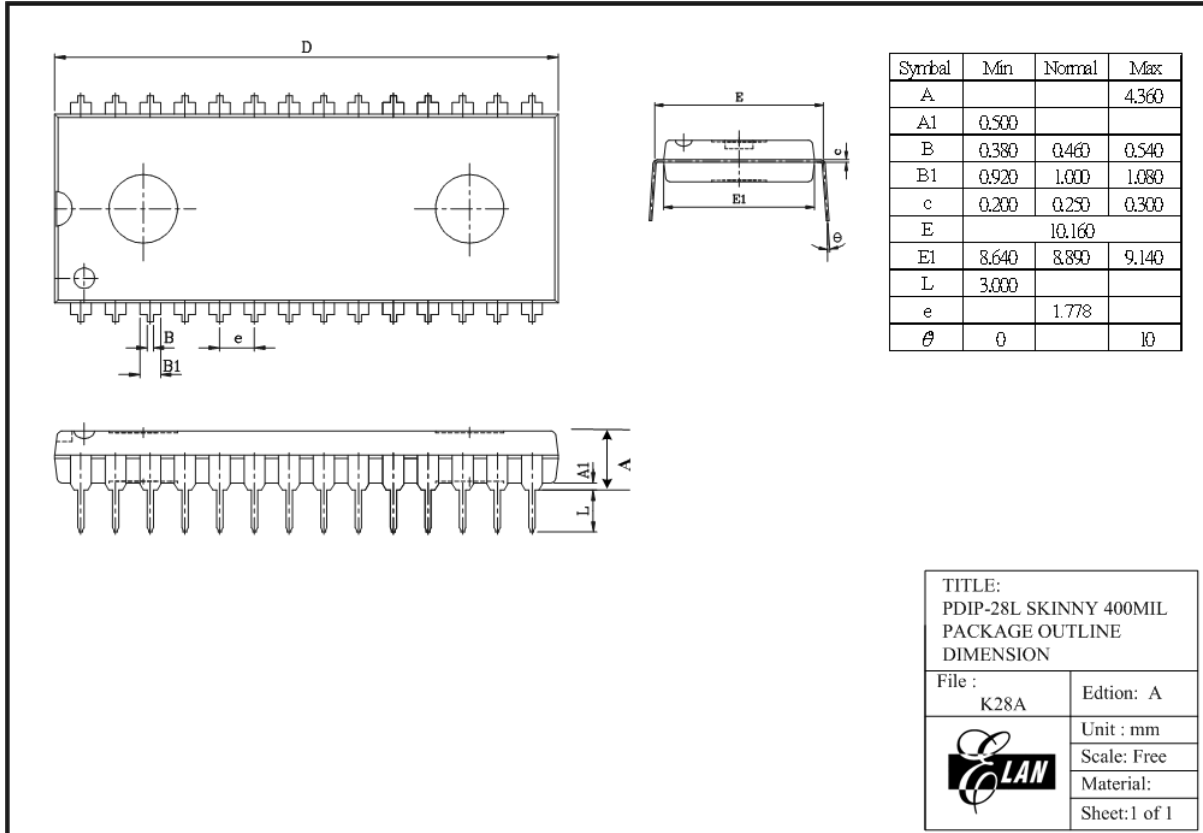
EM78P224N 28-Pin Skinny DIP Package Type
